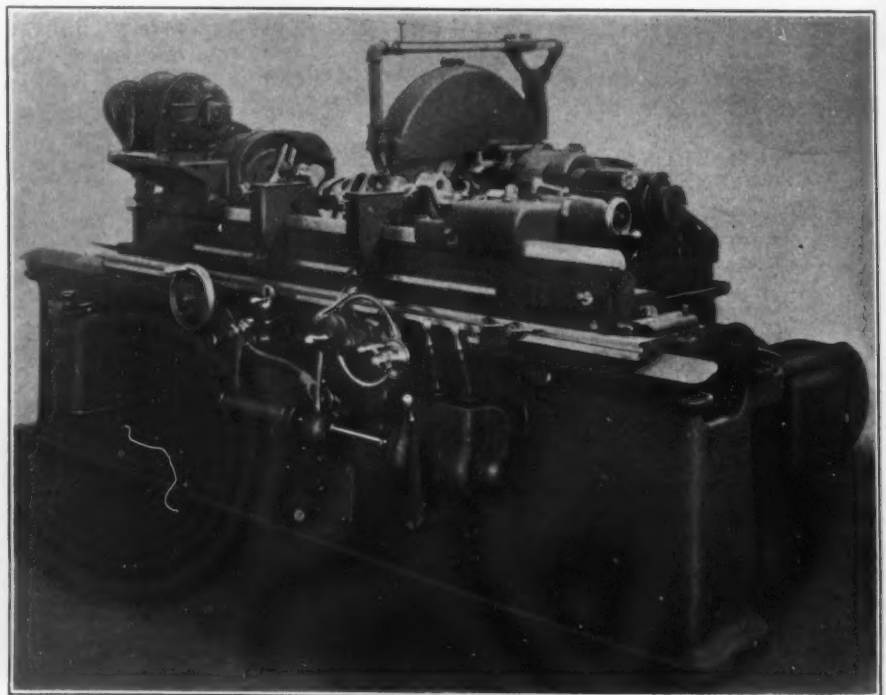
MOTOR-DRIVEN MACHINE WITH POWER TRANSFERS
